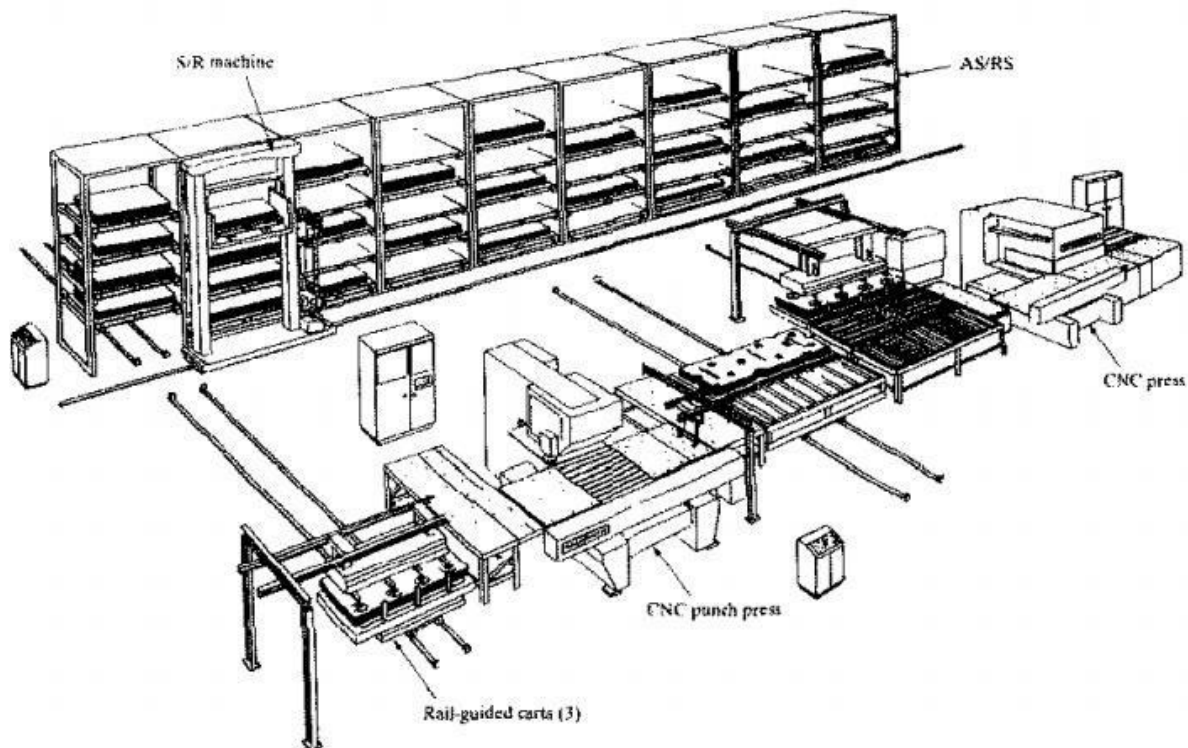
Flexible fabricating system for automated sheet metal processing (based on line drawing provided courtesy of Wiedemann Division, Cross & Trecker Co.)
